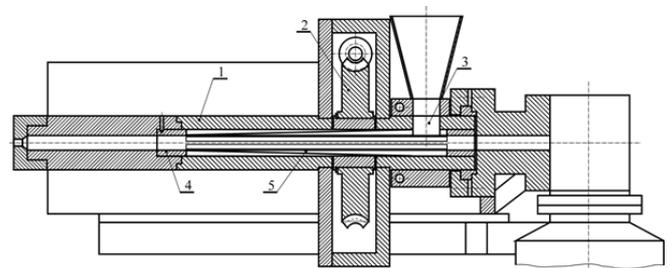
Longitudinal section diagram of the active grooved feed section of the extruder which eliminates shifting and deformations of the feed opening: 1 - barrel segment, 2 - worm wheel, 3 - feed opening, 4 - grooved sleeve, 5 - grooves [7]
